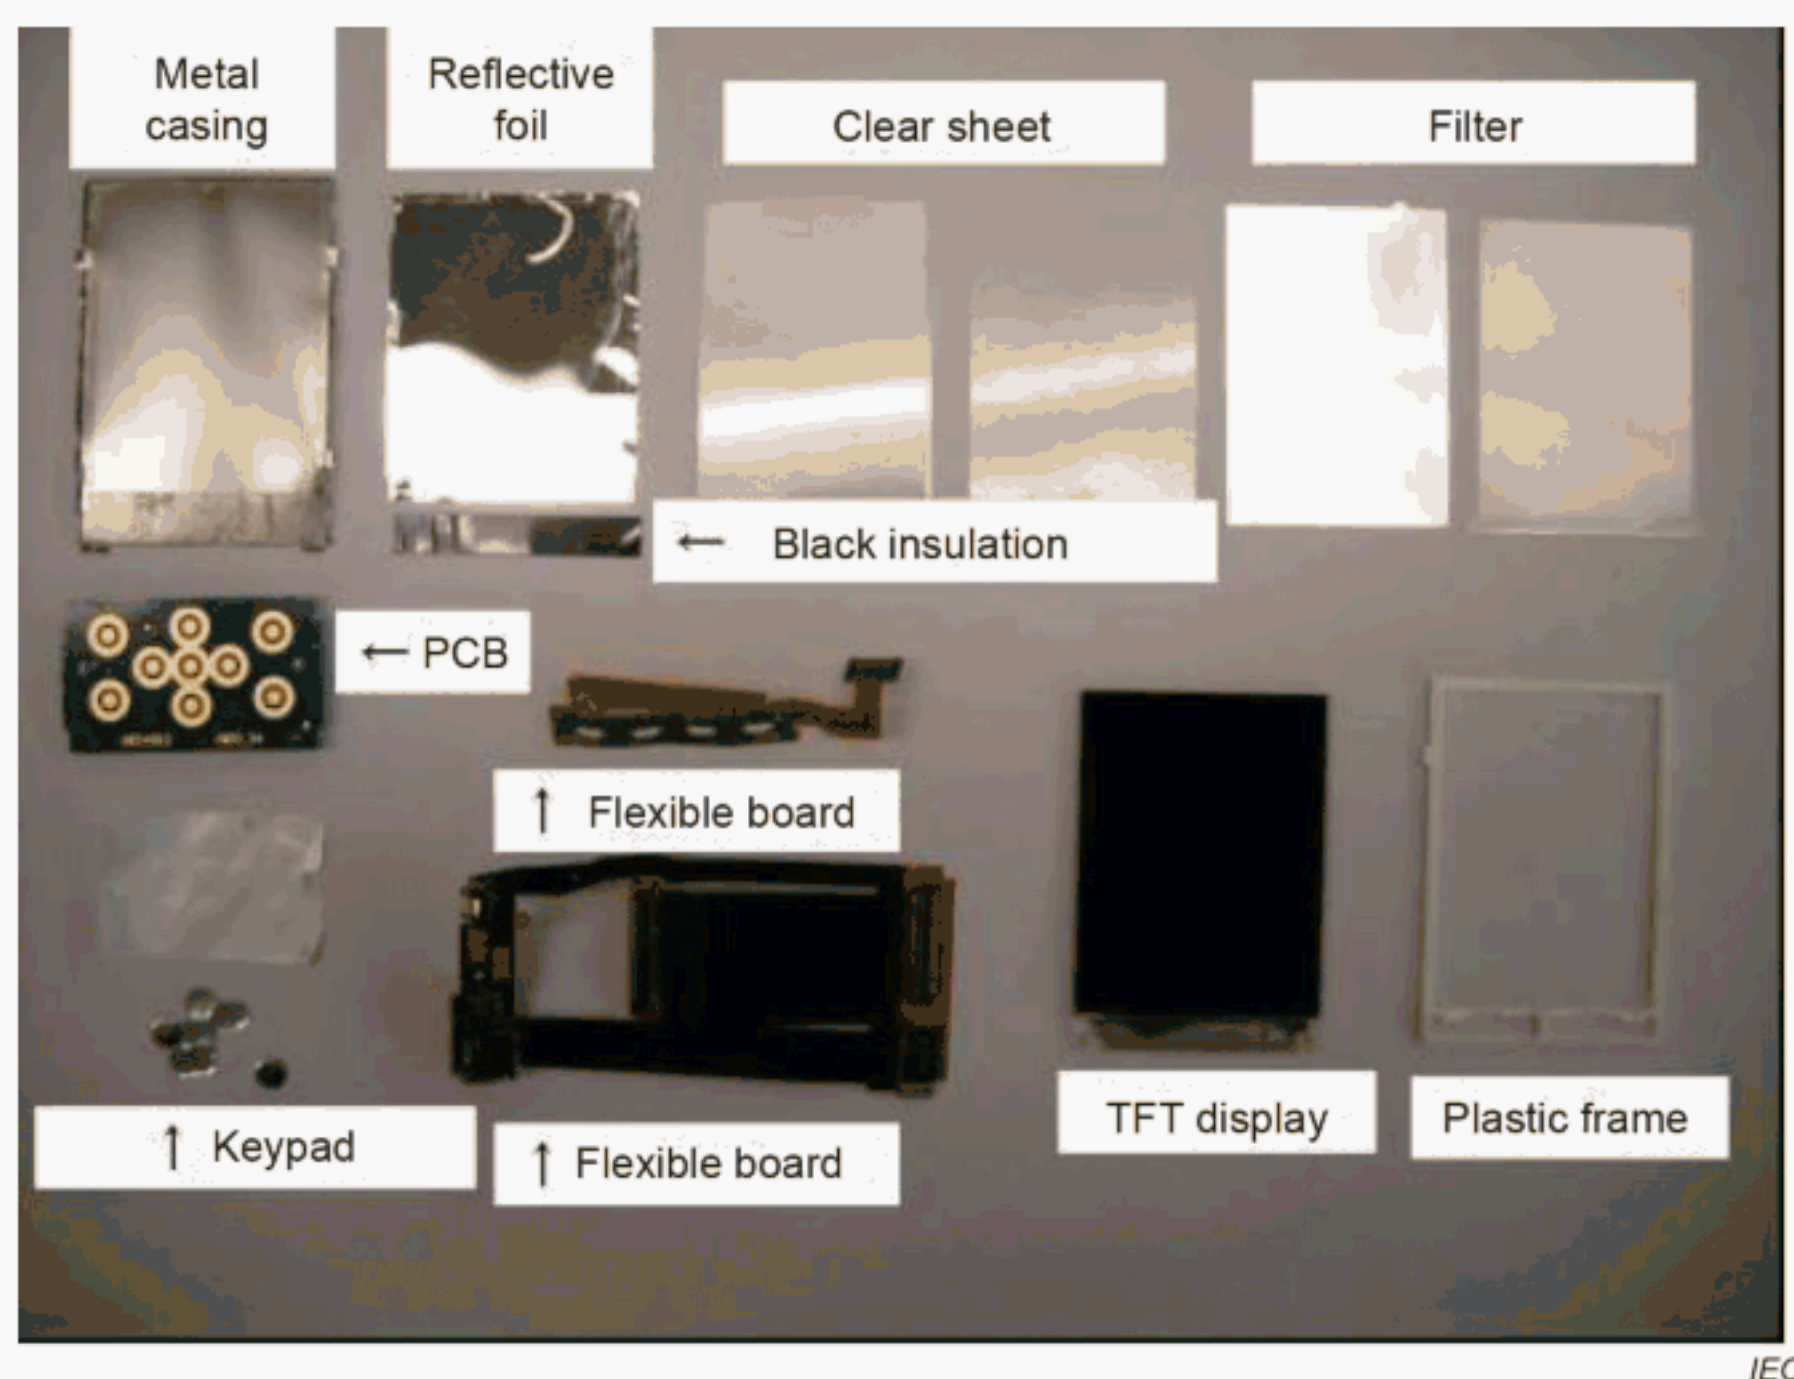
Parts of the TFT display of the mobile phone (type B) after partial disjointment
